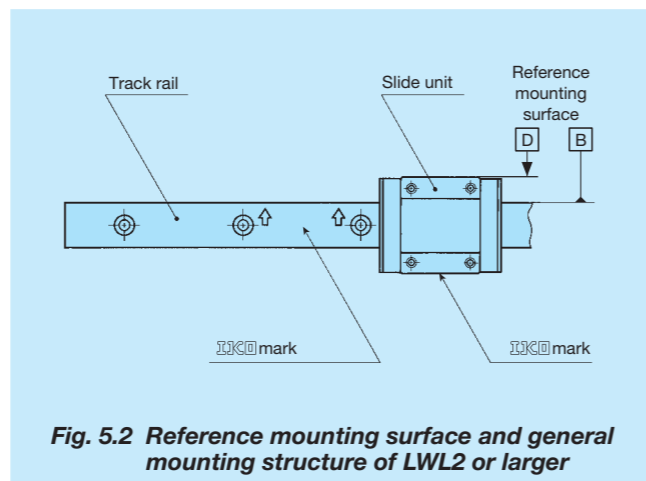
Reference mounting surface and general mounting structure of LWL2 or larger
